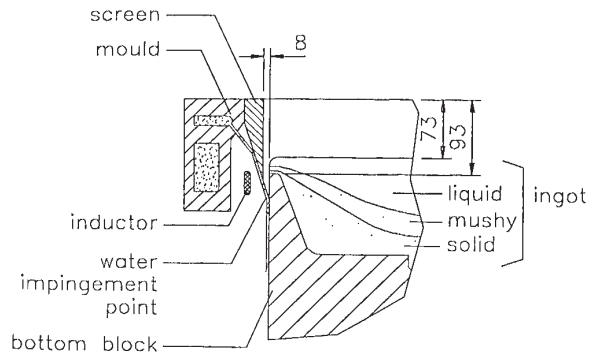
Cross section of mould, emerging ingot, and bottom block in an early stage of casting.
